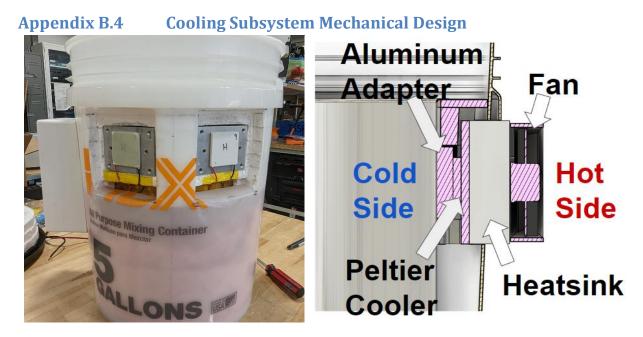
Peltier Cooler and Adapter Mechanical Design
